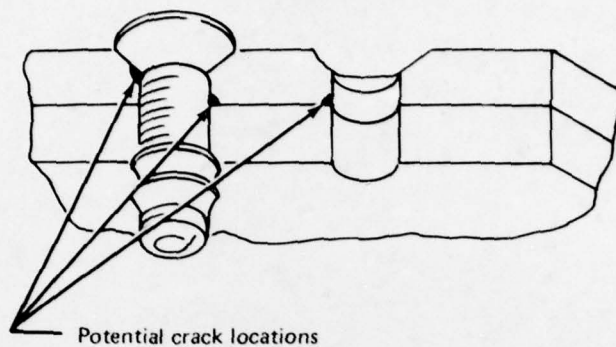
Typical Locations of Cracks in Fastener Holes
